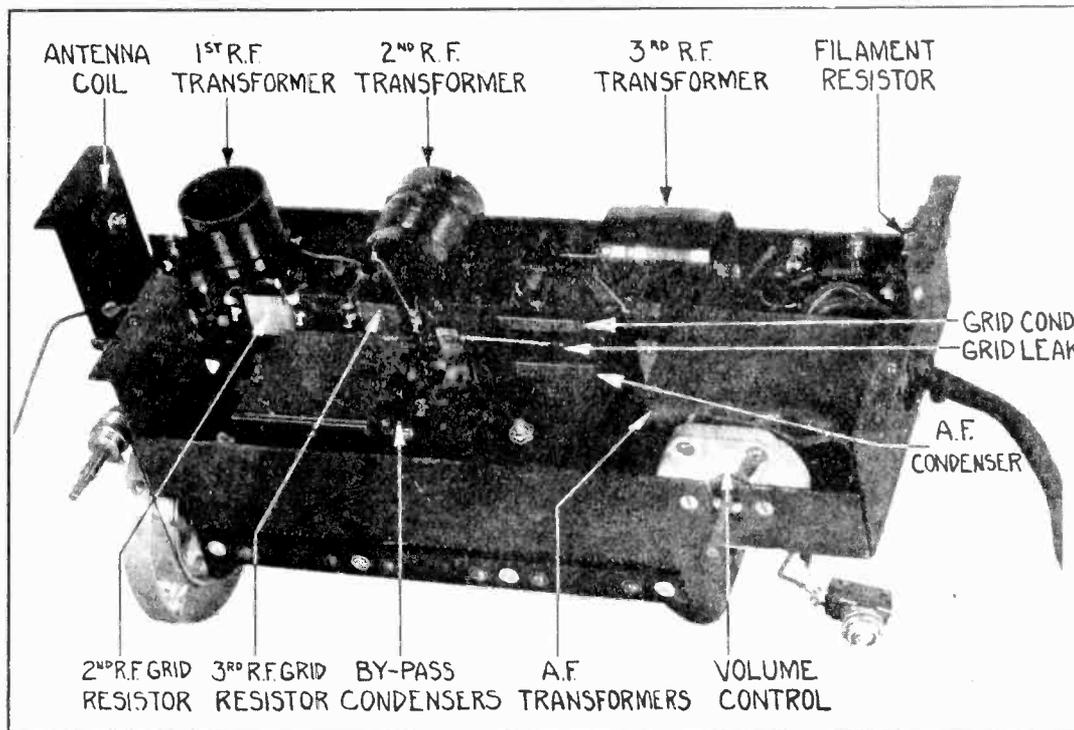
Sub-chassis assembly showing antenna coil, radio frequency coils, by-pass condensers, resistances and audio frequency transformers
